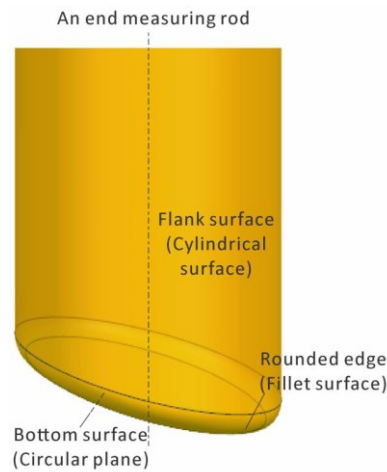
The geometric shape of an actual end measuring rod includes a cylindrical surface, a bottom plane, and a fillet surface.
